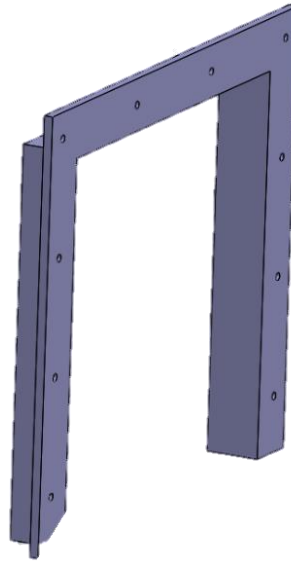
Final design of the flange shape used for the wind tunnel, modeled on SOLIDWORKS.
